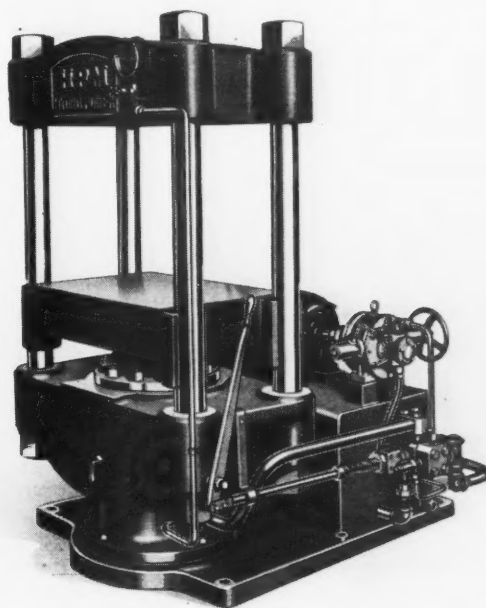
H-P-M Platen Press with Hydro-Power Unit that Makes the Equipment Self-contained
